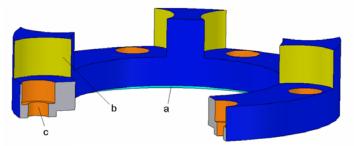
Elastic semi-coupler with flange - type rosette: a – bore hole Φ 130 H7 for centering on the bearing; b - contact surface with the elastic rosette; c - 8 holes $\Phi 18/\Phi 11$.
